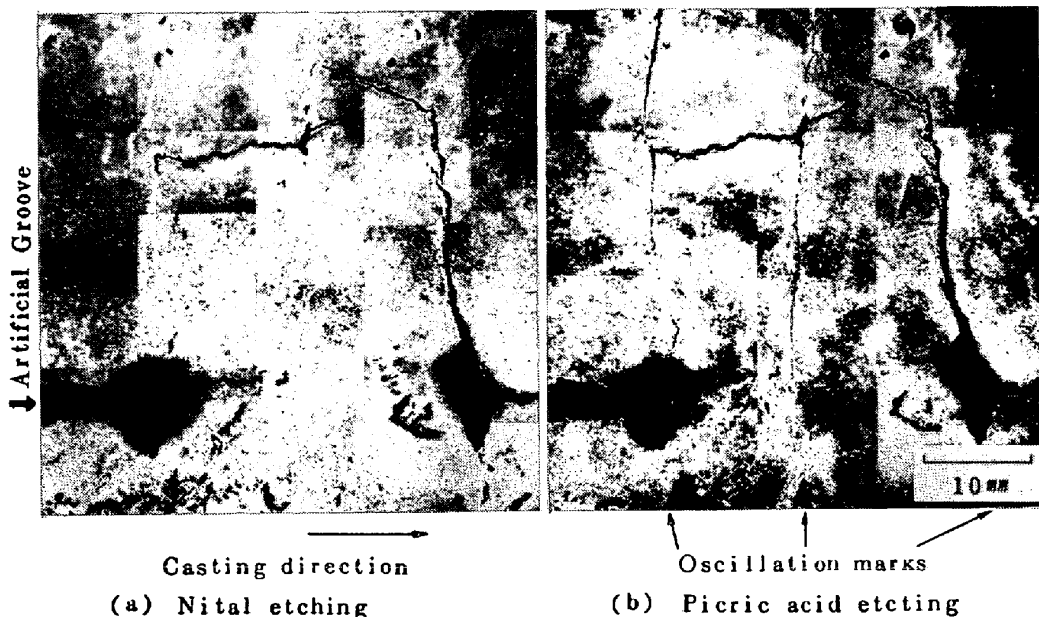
Large crack on a cross section parallel to the surface, 0.3mm below.
